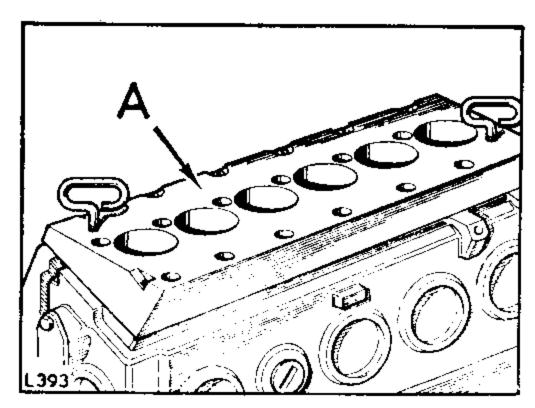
Jig block for reboring A—Jig block, Part No. 261288
